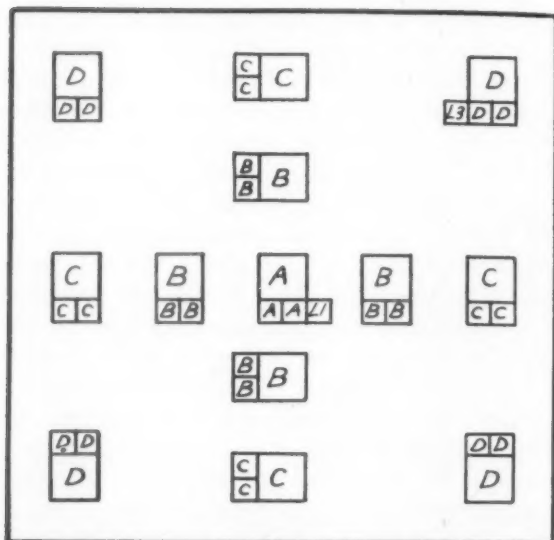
POSITION OF LONGITUDINAL, TENSILE AND IMPACT SPECIMENS REMOVED FROM 4½-IN. SECTION C SHOWN IN FIG. 4.
